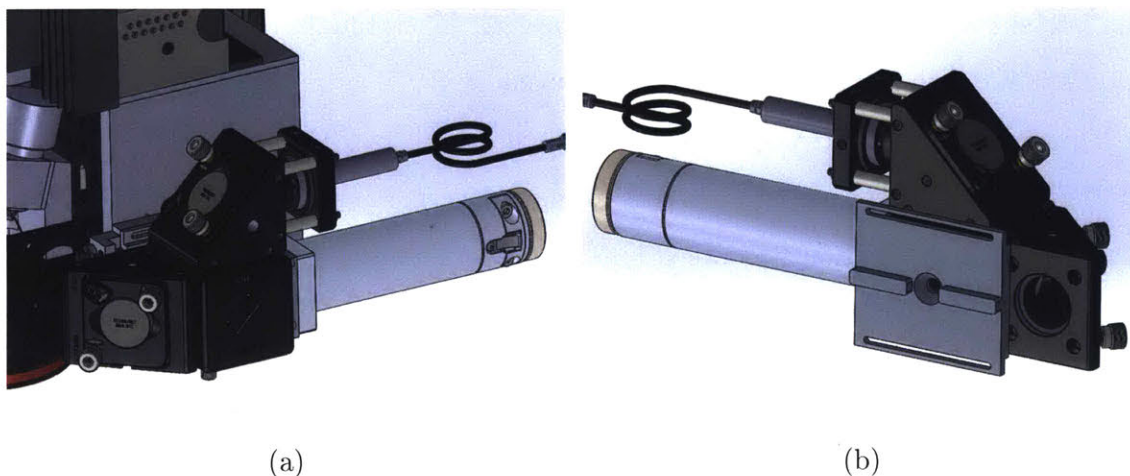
Model of optical head assembly, emphasizing the optical pipeline components.
